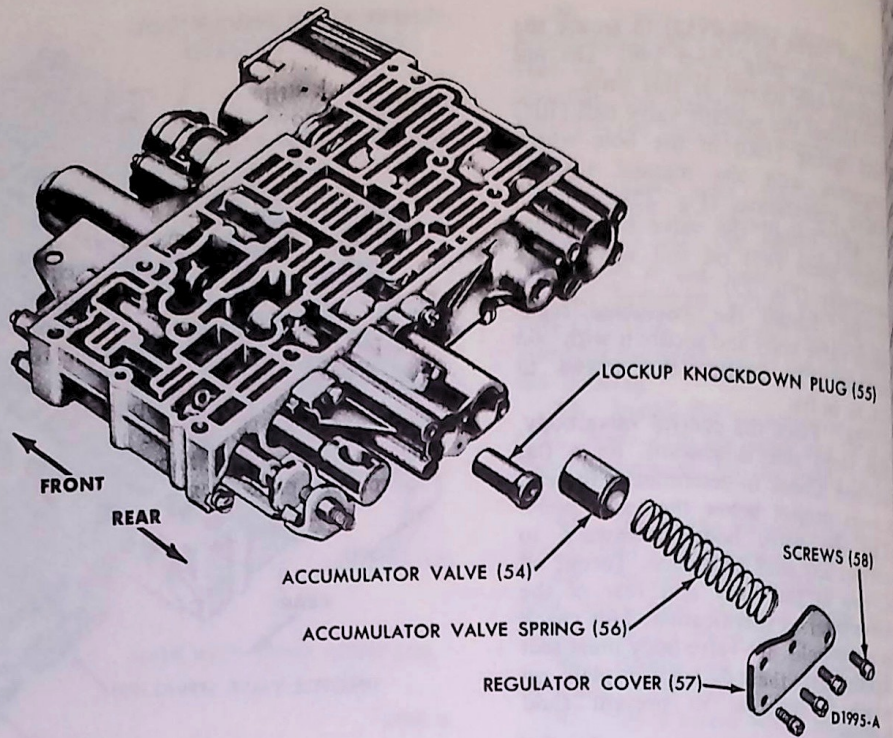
Lockup Knockdown Plug and Accumulator Valve
